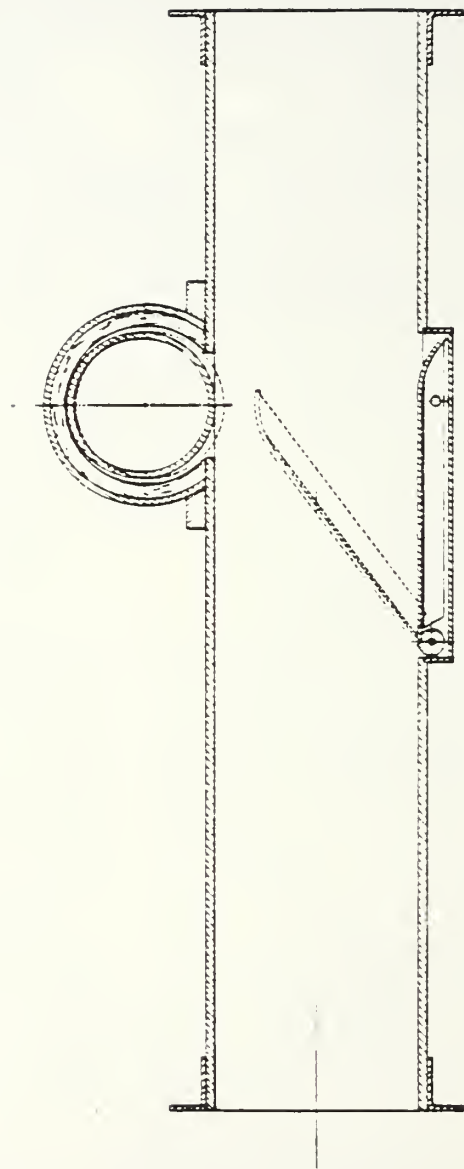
Back Pressure Valve Cutaway Showing Ramp Positions and Range of Drum Adjustment
